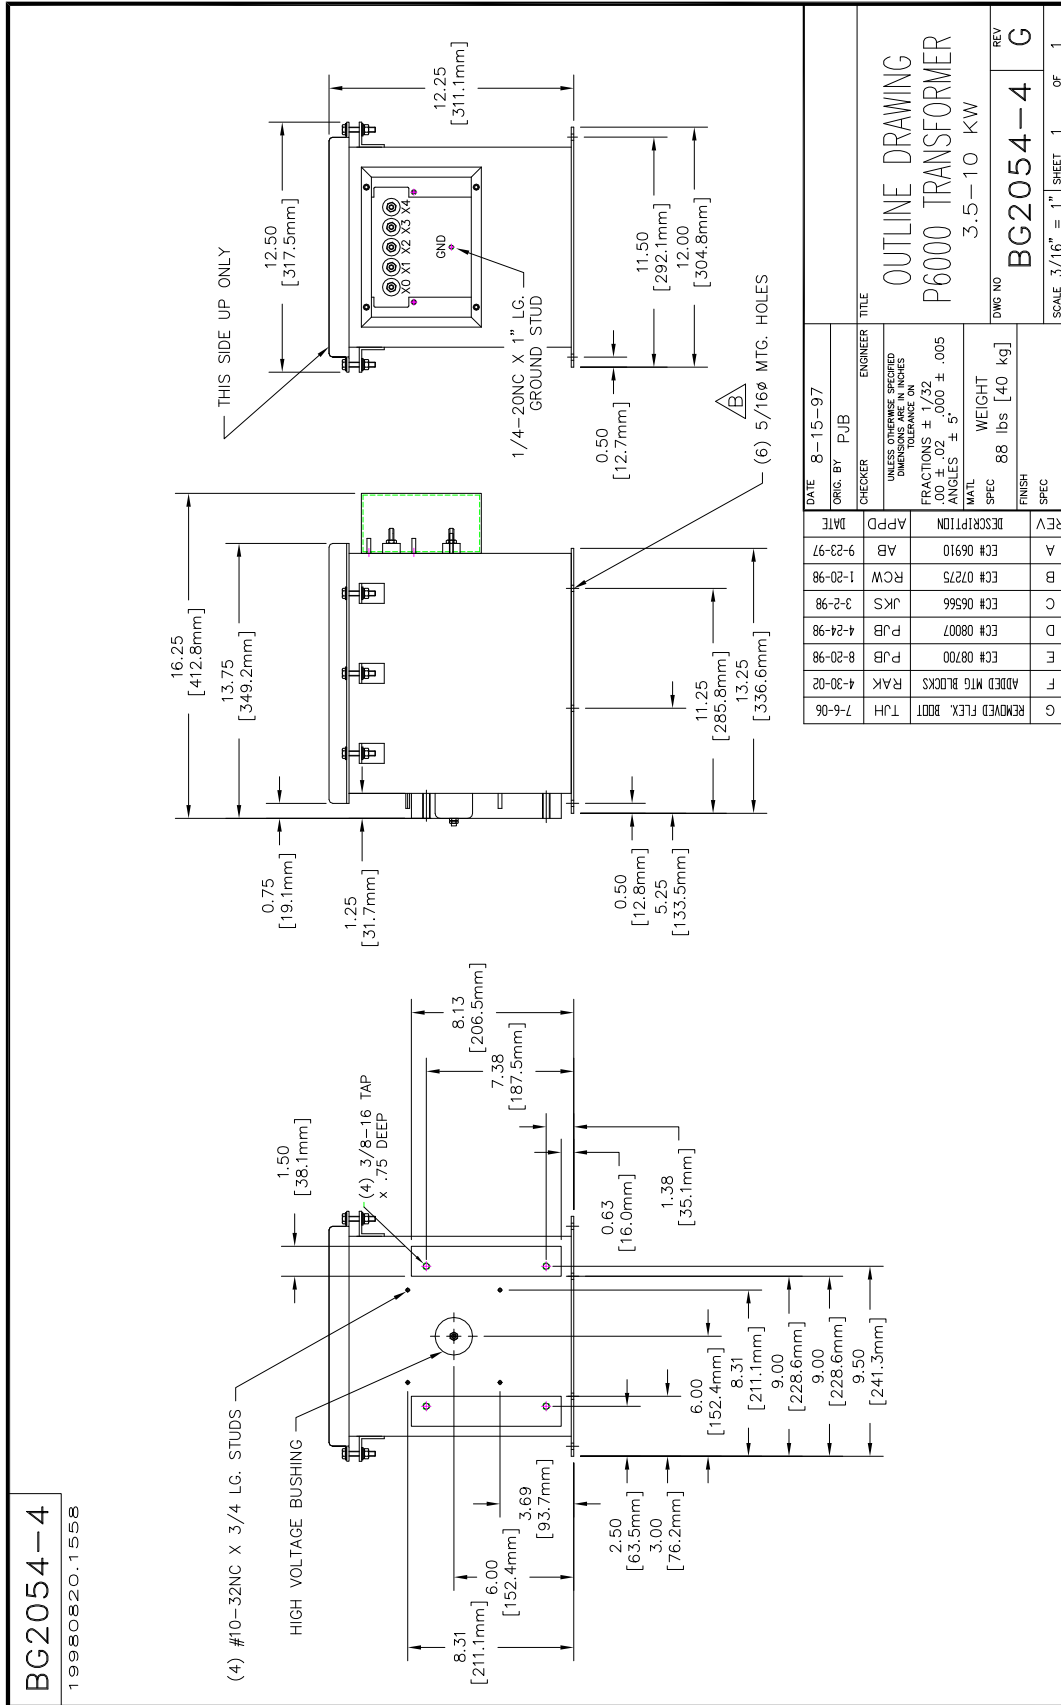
5.0-10.0 kW CSI High Voltage Transformer Outline Drawing
